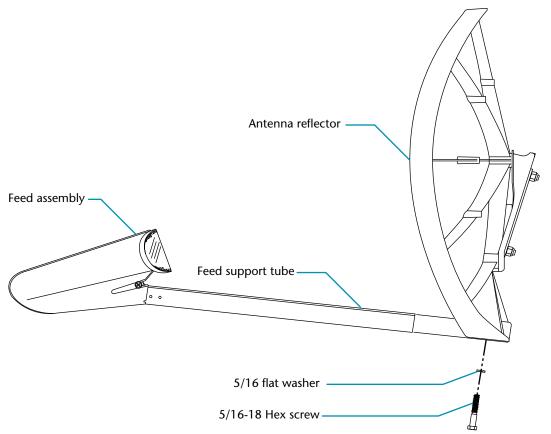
Installing feed assembly and feed support tube onto antenna reflector
